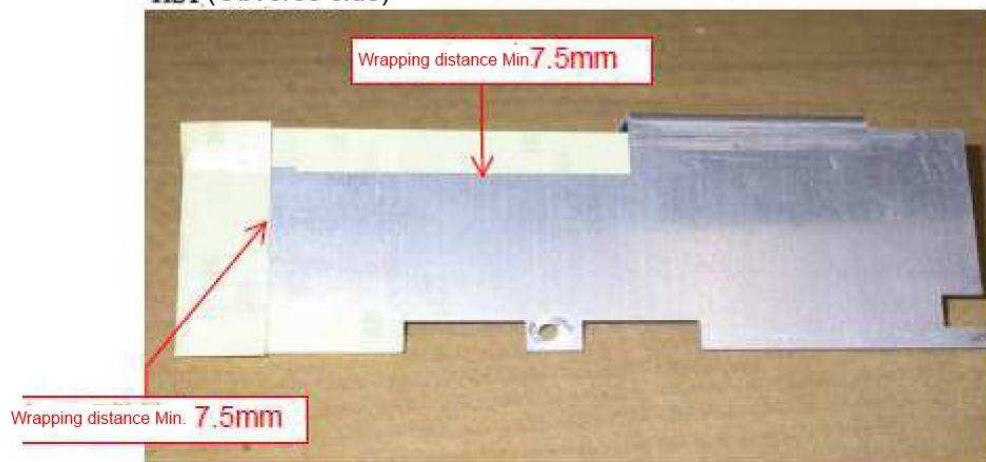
Dimension figure of insulation tape wrapped on heatsink
